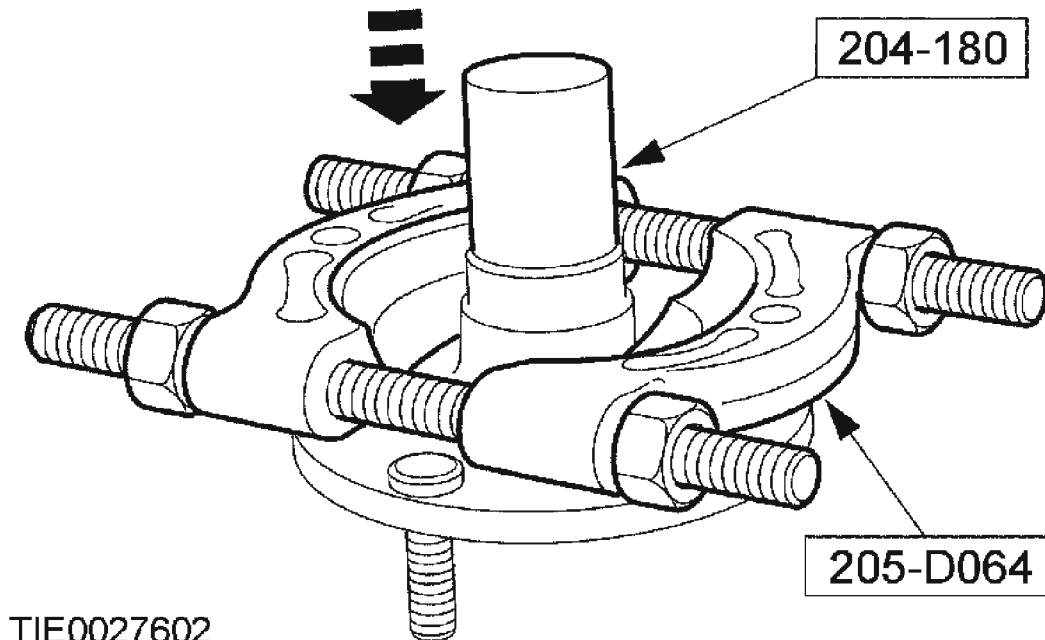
Removing Wheel Hub And Outer Bearing Race
